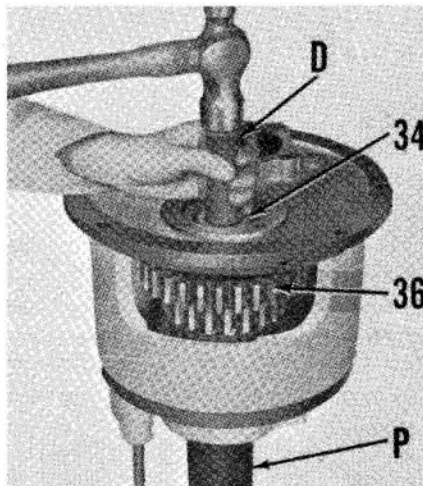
Using suitable drift (D), drive lower shaft from bearing (34) and cluster gear (36). Use hollow pipe (P) to support gear.
